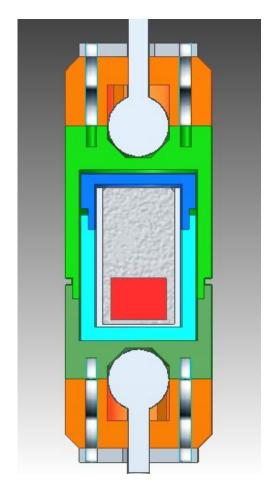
Source Encapsulation Design. Shown are the active volume (red), encapsulation from manufacturer (silver), first layer of encapsulation top and bottom (blue), second layer of encapsulation top and bottom (green), beaded chain (white), chain attachment (orange), and attachment washers (grey). Overall dimensions: 3cm length, 10.5 mm diameter
